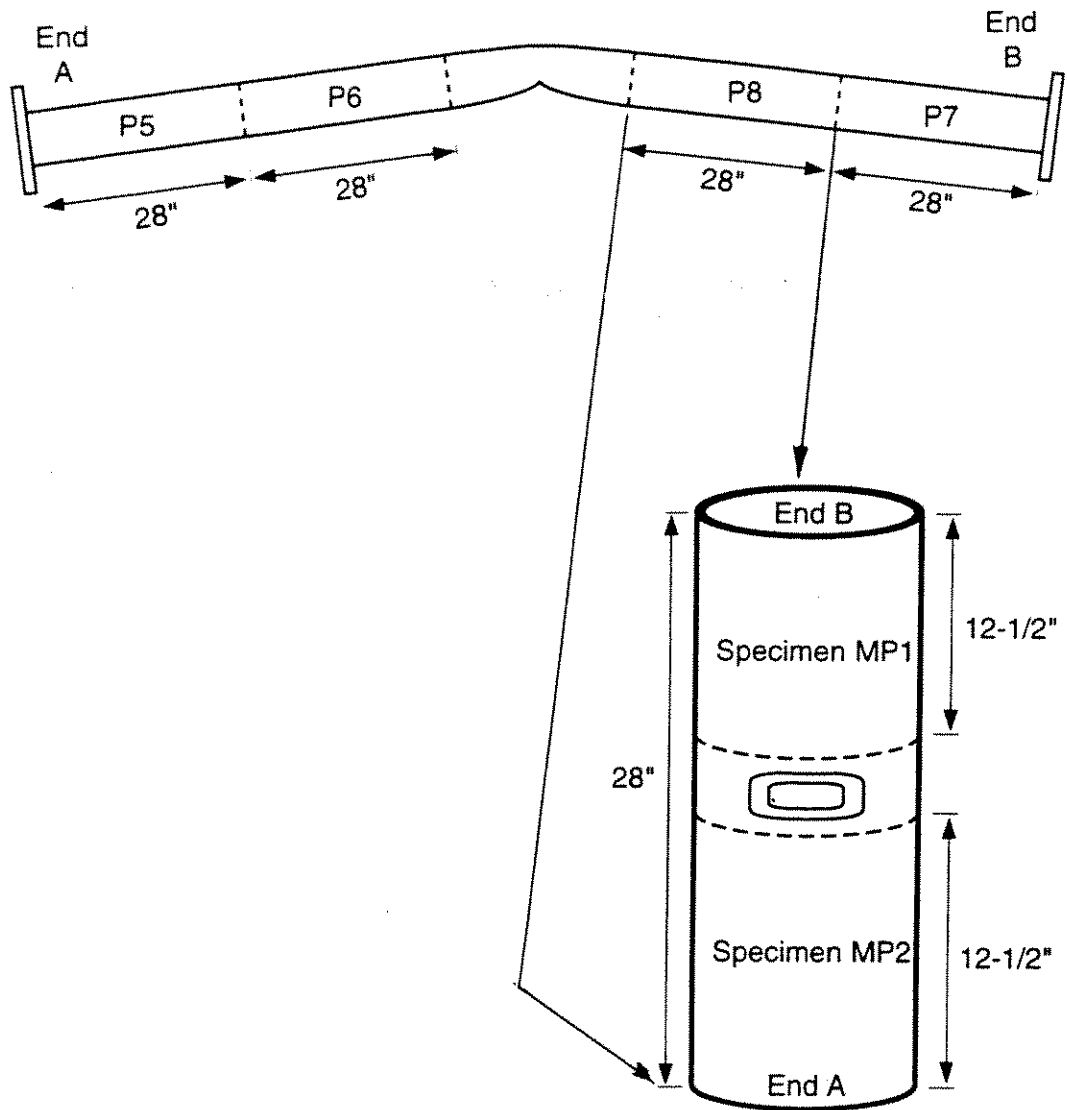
Layout of Specimen P8 for Test Specimens MP1 and MP2
